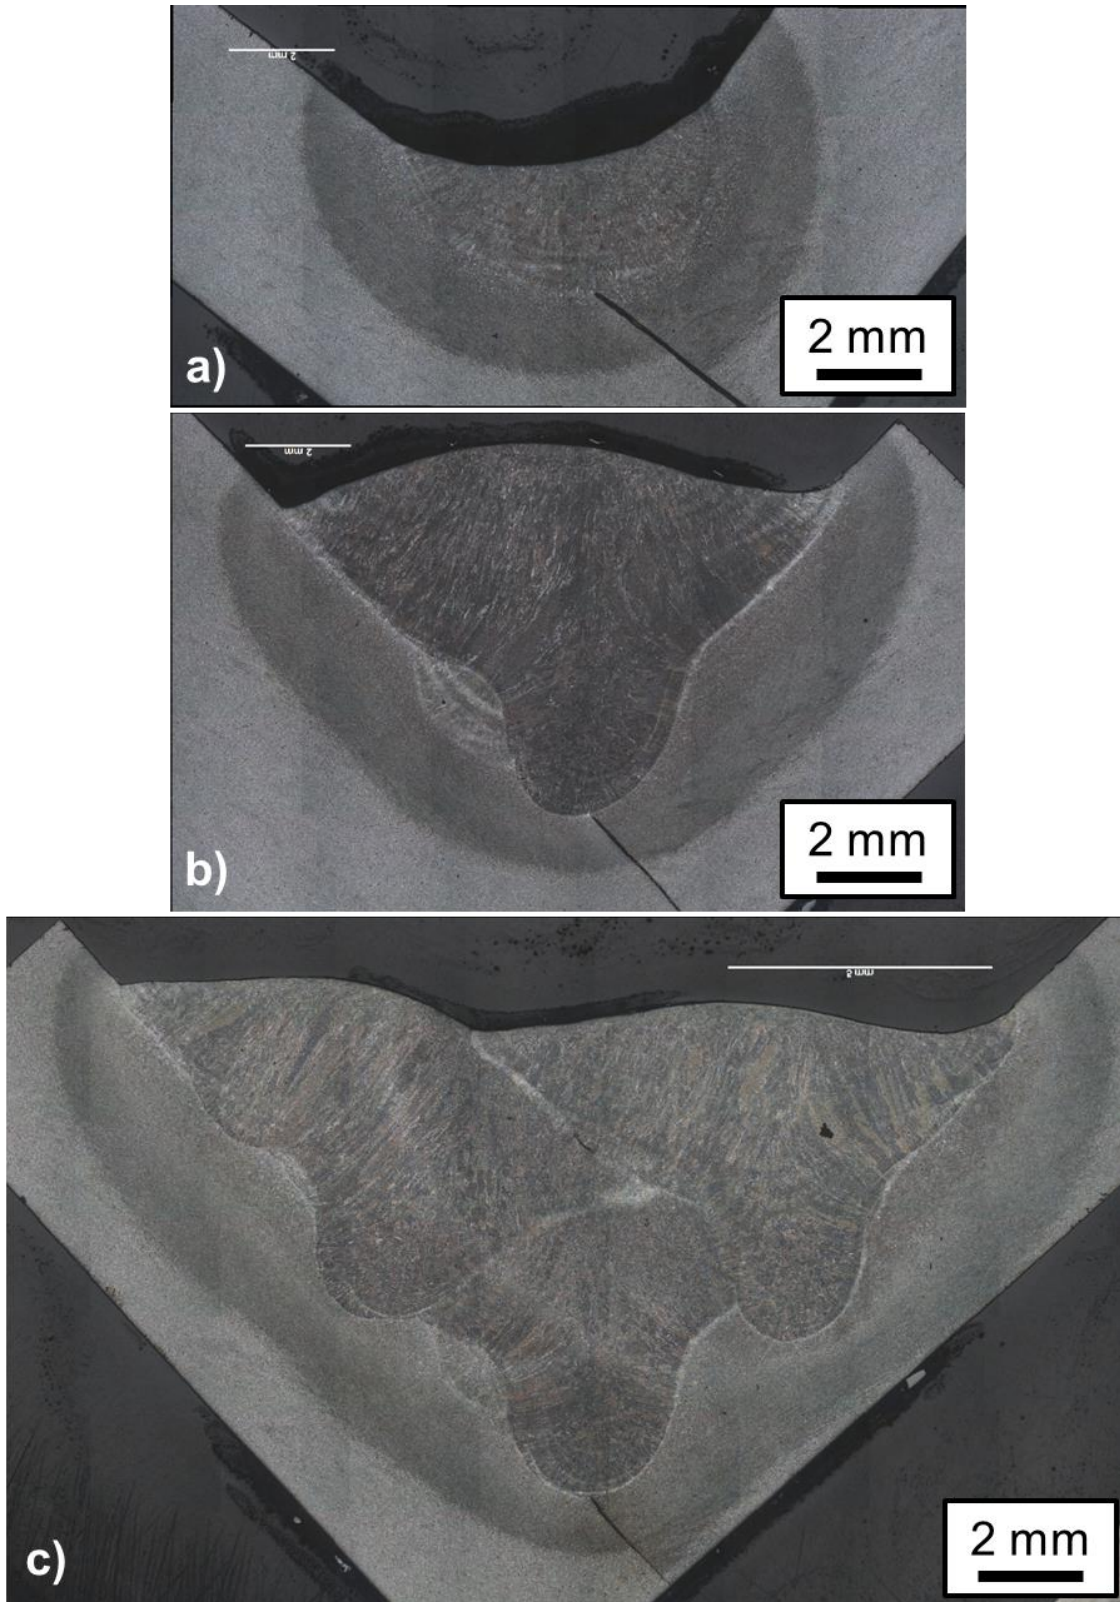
Representative cross-sections of the different joint conditions for weld bead size comparison of the a) GTAW root pass, b) GTAW root pass and GMAW cover pass, and c) GTAW root pass and three GMAW cover passes.
